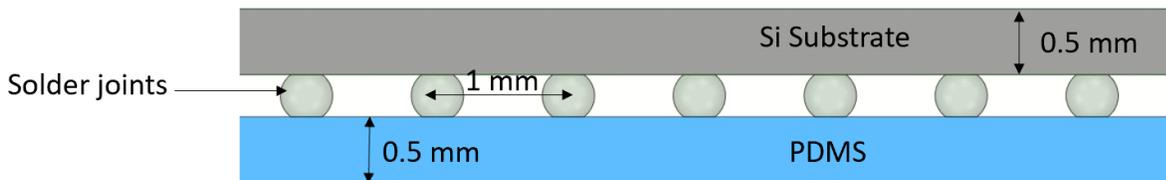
cross section of the model showing Si-IF bonded to PDMS buffer layer through solder joints.
